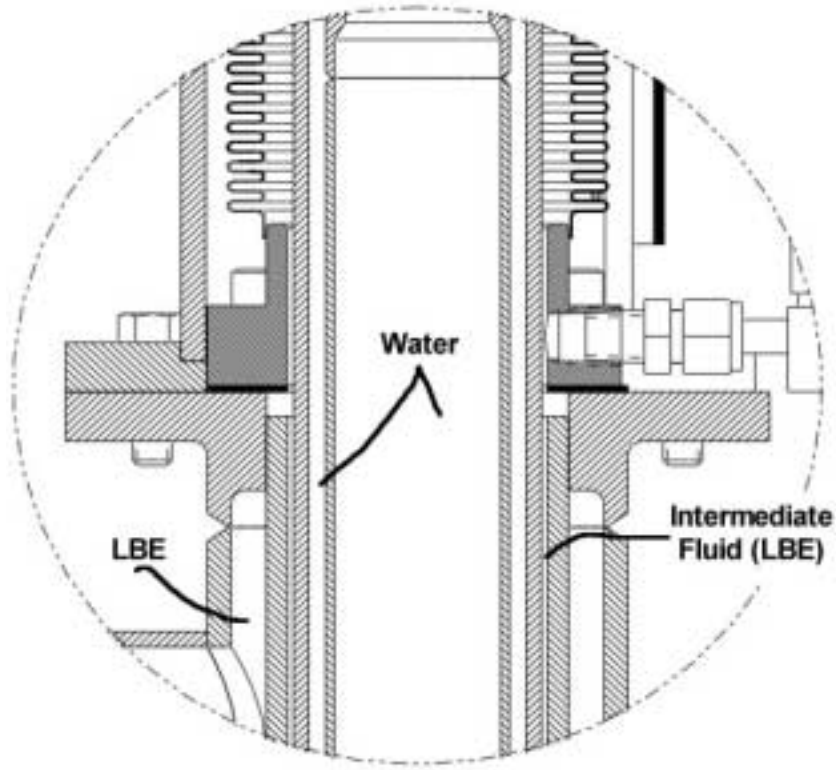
Enlarged View of Heat Exchanger Cross Section.
